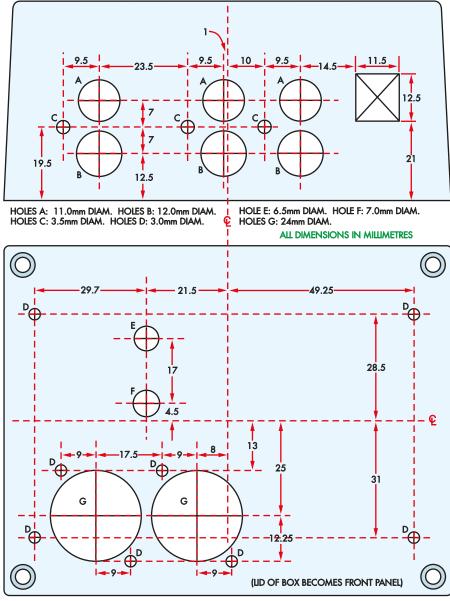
this is the drilling template for the case. Start each hole with a small pilot drill to ensure accuracy and use a tapered reamer to enlarge the holes for the RCA sockets (A and B). The two holes for the XLR sockets (G) can be made by drilling a series of small holes around the inside diameters, knocking out the centre pieces and filing for a smooth finish.
